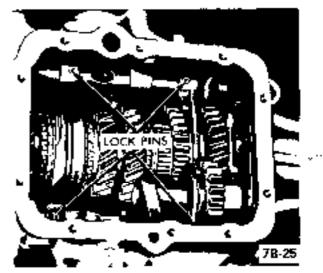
B-26 Position of Lock Pins for Shifter Forks and Selector Dogs
